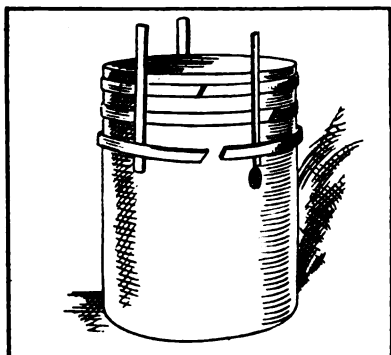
Illustrating Practical Method of Removing Piston Rings.
